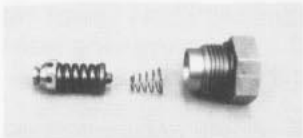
Charge Check and Relief Valve Components (Through 87-39)
